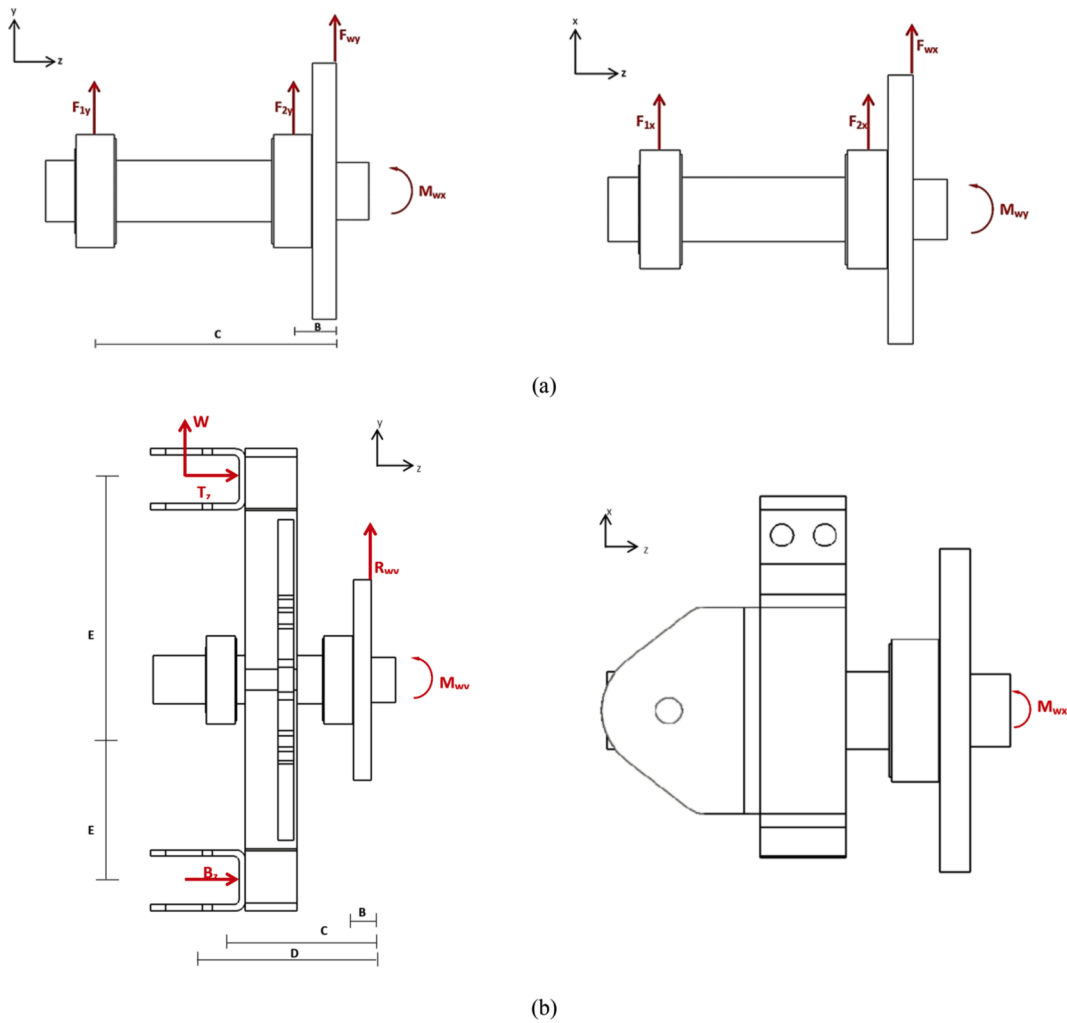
Free body diagram of (a) Shaft and (b) Assembly.
